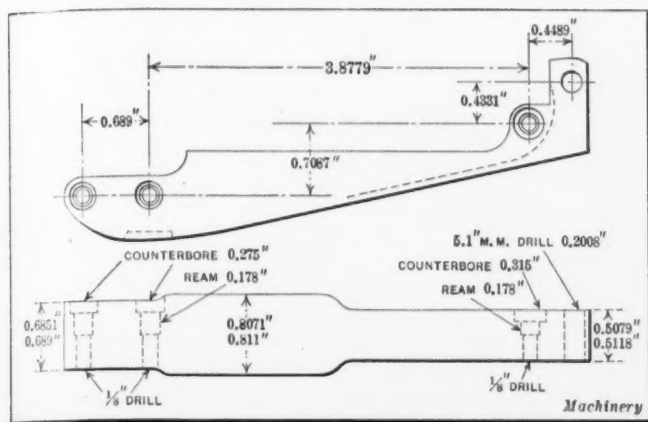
Rifle Receiver Floor-plate which is drilled, reamed and counter-bored in Machines shown in Fig. 23
